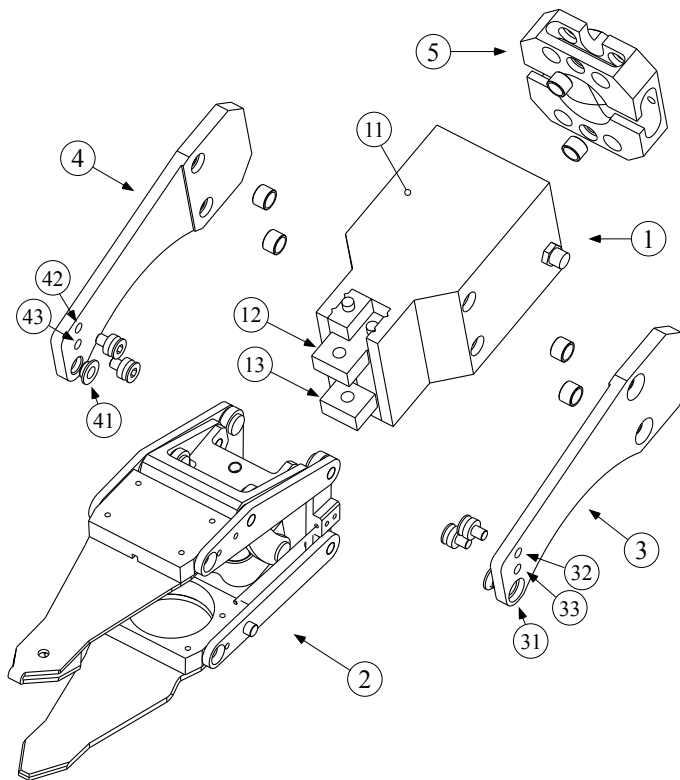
Exploded view of the gripper with driver (1), left (3) and right (4) mounting plates, arm mounting flange (5), fingers assembly (2) (4R in neutral configuration; 3R in open configuration)
